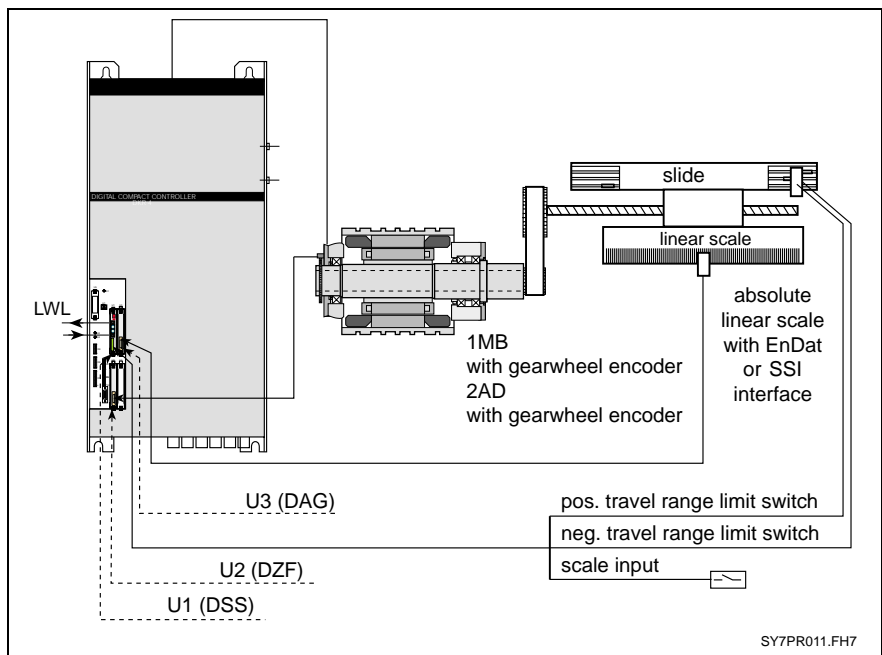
Drive with 1MB or 2AD motor with gearwheel encoder with direct absolute position detection
